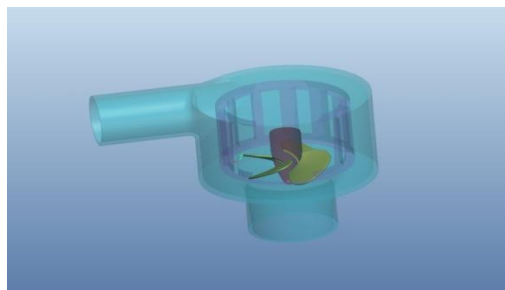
Assembly of Kaplan turbine 3D Model
